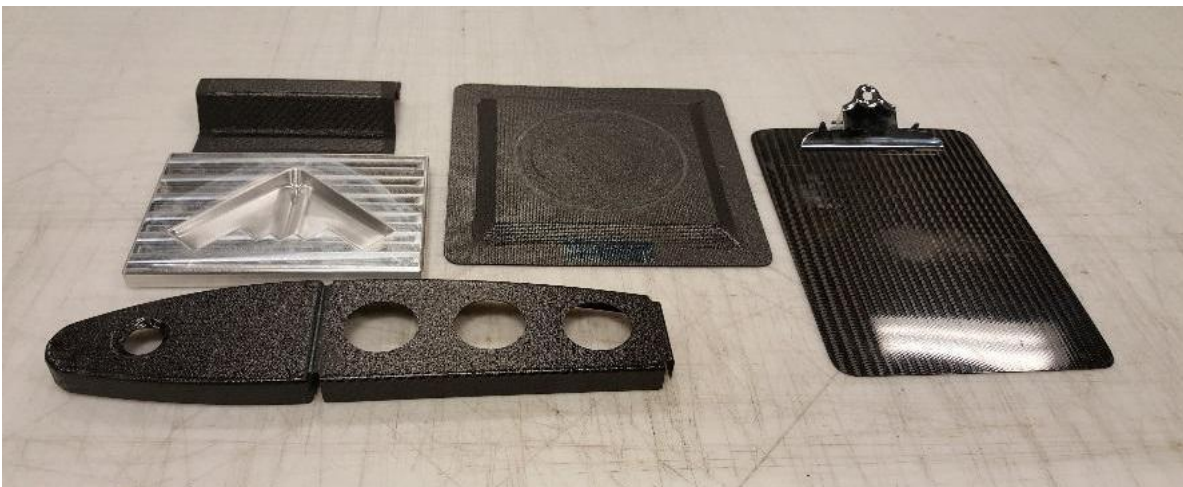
Developed carbon fiber course projects and CNC machined aluminum tool.
